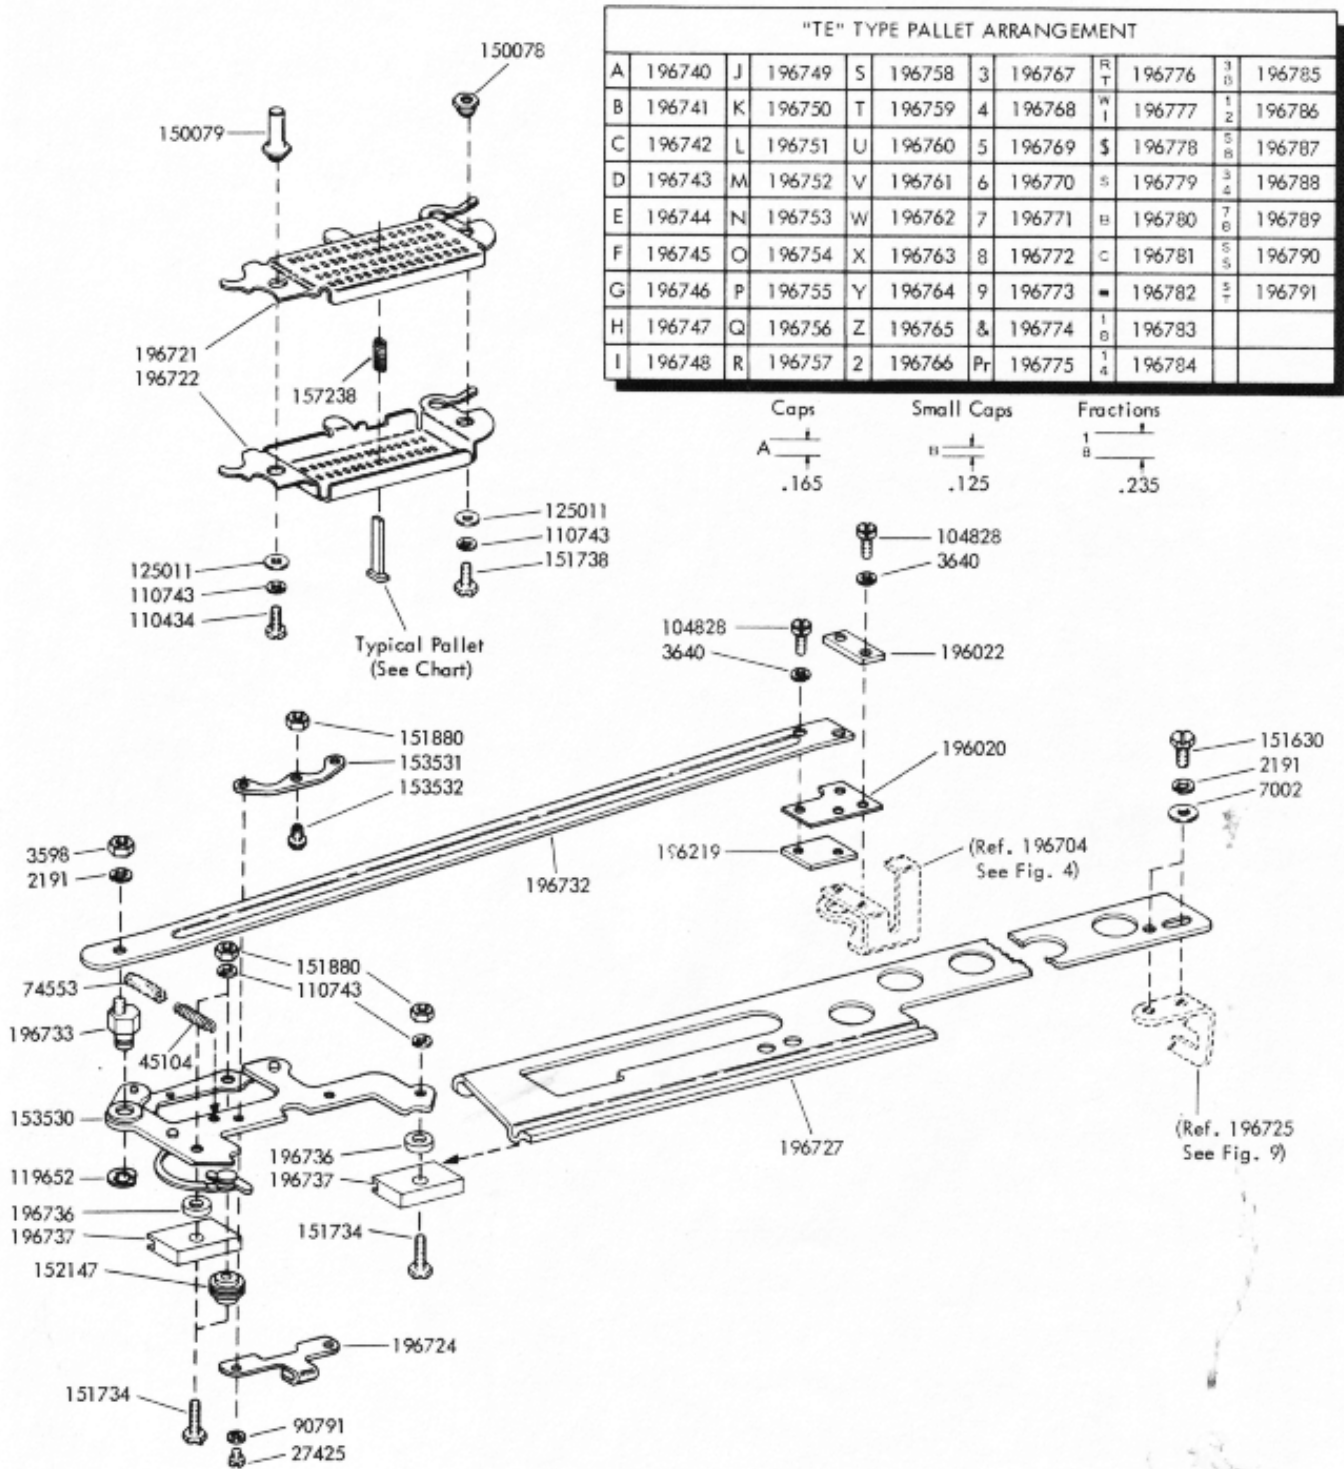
TYPEBOX AND CARRIAGE MECHANISM
